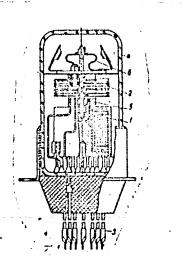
1- electromagnet coil; 2- contact system; 3- bantam mount; 4- tube; 5- armature; 6- omega-shaped laminated spring
